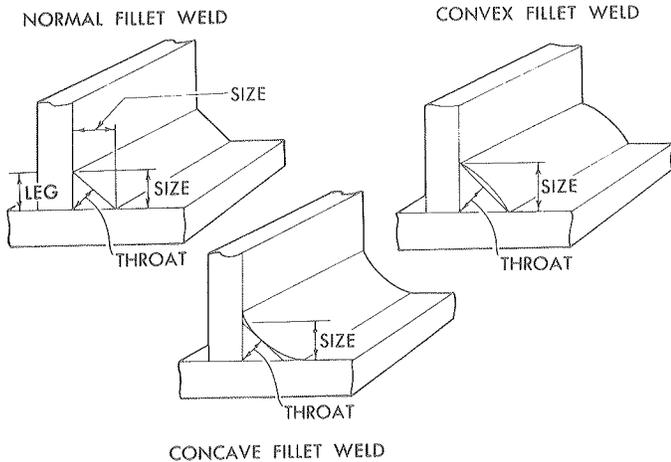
Fillet weld size is specified as the minimum leg length, in inches, measured by the throat dimension which is in shear.
